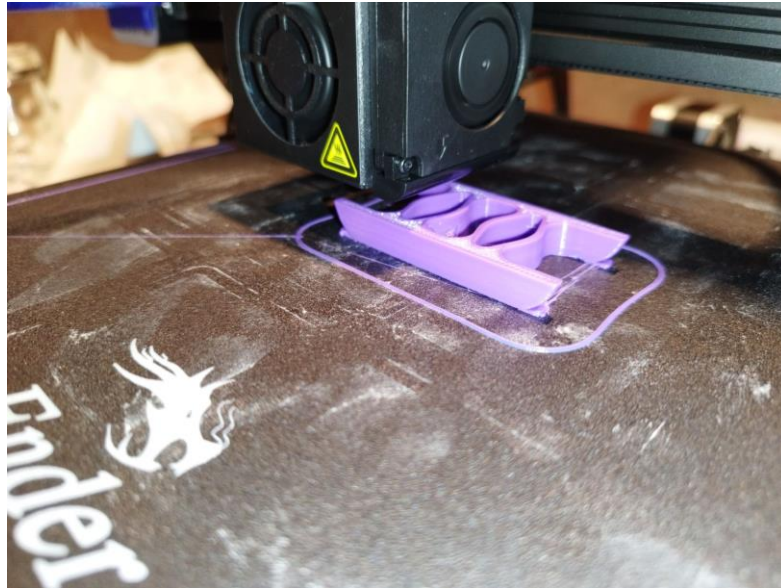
TPU Shock-Mount being printed on Ender 3 Pro
